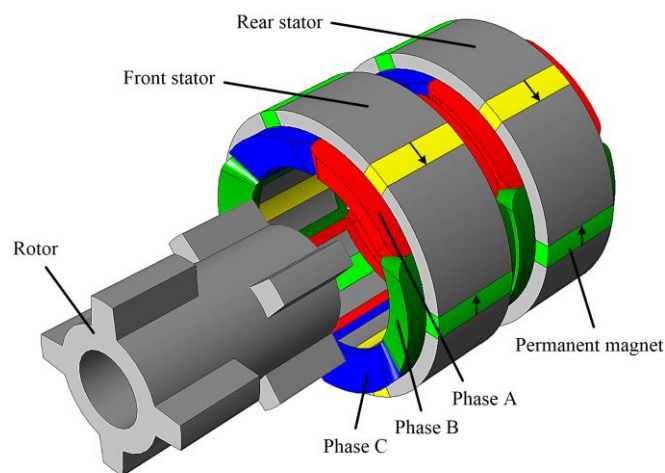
Proposed novel dual-stator 6/4 FSPM machine in exploded view.
